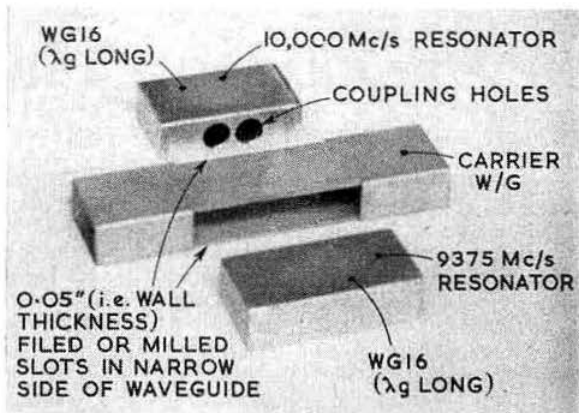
Exploded view of the spot frequency wavemeter illustrated in Fig. 1.
